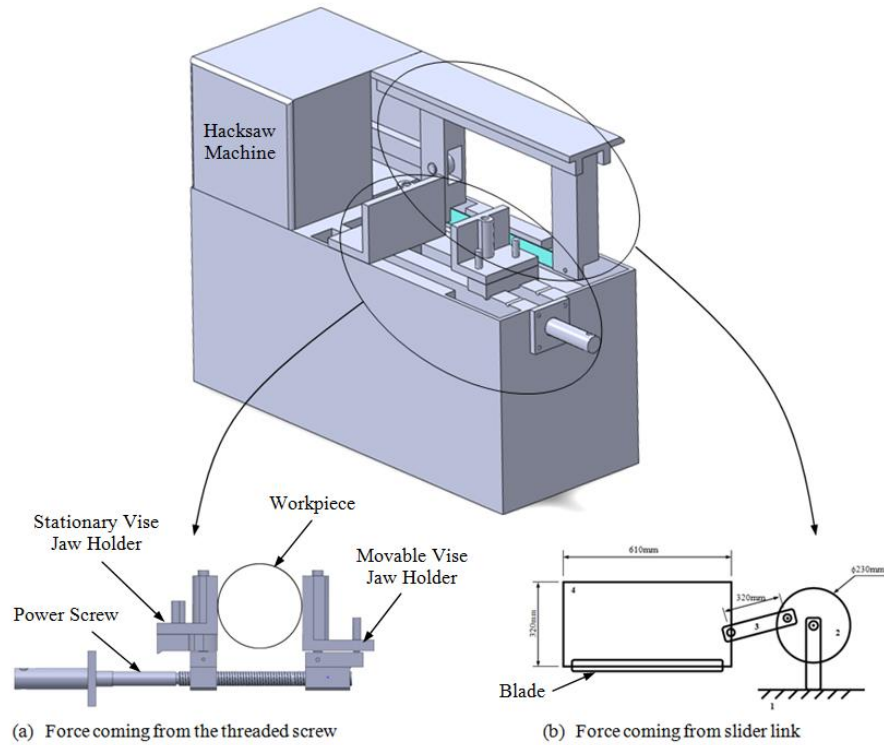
Hacksaw Machine showing the type of loads effect the vise jaw holders
